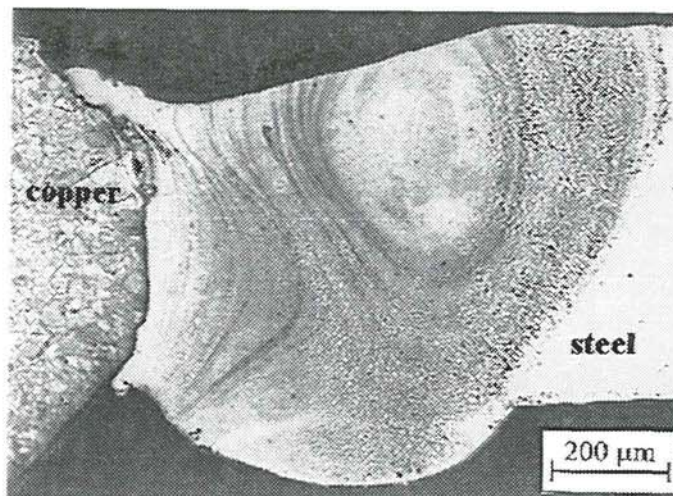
Micrograph of a successful tube weld. Laser power: 830 W (CW), welding speed: 0.5 m/min, shielding gas: argon.
